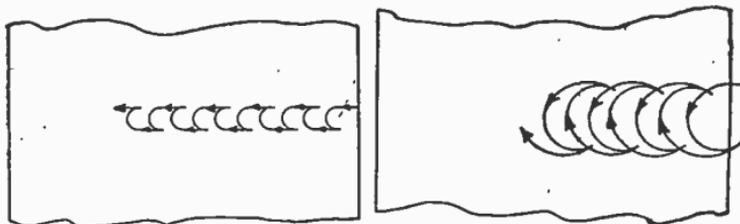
,163.—Movement of cutting torch and tip when cutting thin cast iron.
